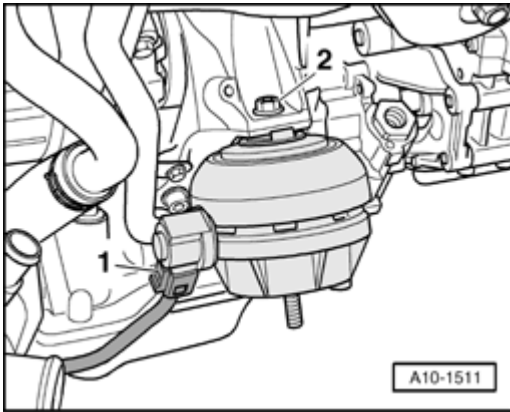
Disconnecting Electrical Connector, Removing Nut And Engine Mount
